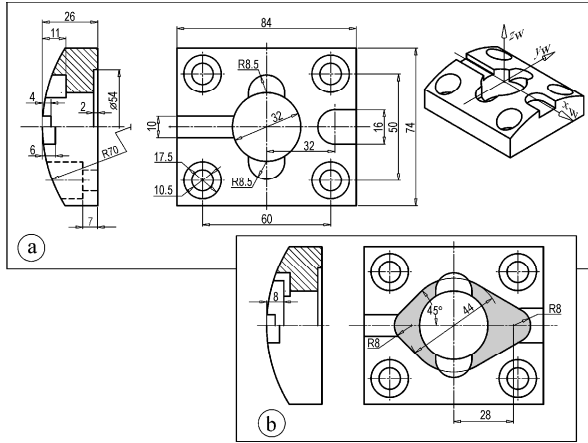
Dimensions of stock (a) and machined part (b) in representative example
